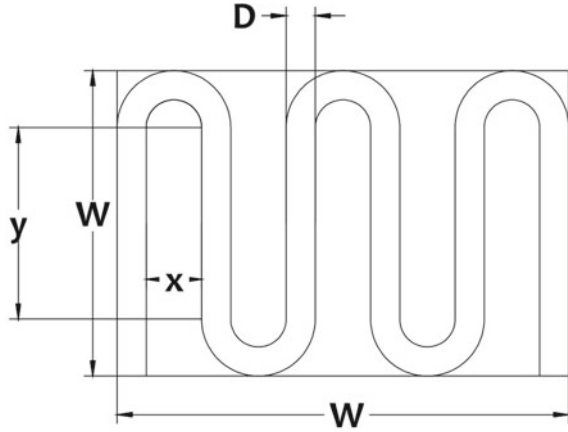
depicts the proposed receiver assembly comprising of serpentine tubes inside a cuboid shaped receiver. The selection of receiver dimension is based on a preliminary analysis of the spot size of concentrated solar irradiance from parabolic dish. The receiver will be insulated from top in order to prevent heat loss from one of its surface. The serpentine tube and receiver is made of copper with high thermal conductivity of 401 W/mK at 300 K Incropera (2006). For higher absorption of solar flux, the serpentine pipe is painted with black colour whose absorptivity is 0.98 Incropera (2006). The entire receiver is enclosed inside a cavity made up of glass as depicted in Fig. 5.1. Due to the presence of cavity the ambient air will not be in direct contact with the base of the receiver where the reflected irradiation is concentrated. This will reduce losses by convective heat transfer. The glass may be coated with a solar selective anti-reflective coating to reduce transmission of reflected thermal radiation. Such a design is envisaged to be useful for high-altitude areas with low ambient temperature, to avoid reaching freezing point temperature of water.
